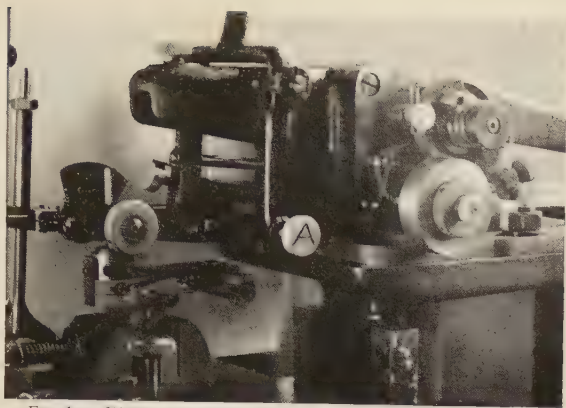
Dividing Machine with Ruling Device. About half-size.
